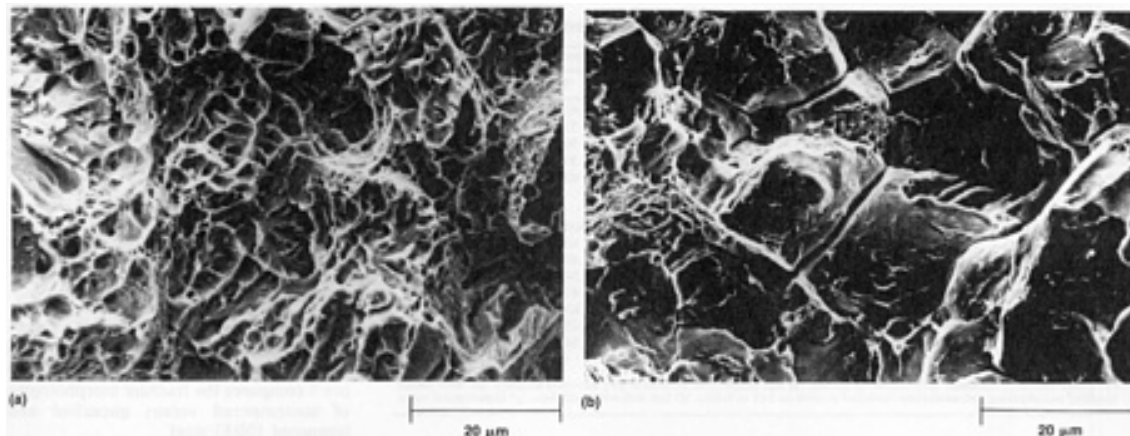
Effect of heat treatment on the fracture appearance of 10B53 steel. (a) Ductile fracture surface of specimen austempered to 53 HRC. (b) Brittle fracture of specimen quenched and tempered to 53 HRC. Courtesy of Vermont America Corporation
